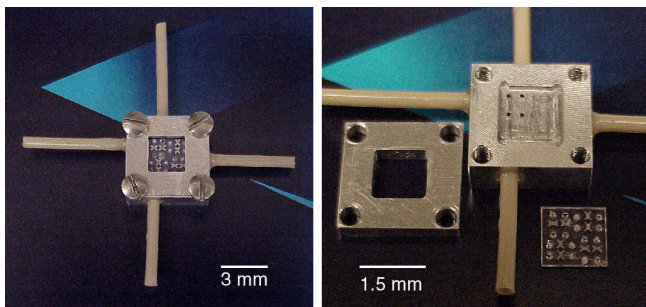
Fixture used to connect the devices to macroscale fluidic control and measurement system a) assembled b) disassembled
